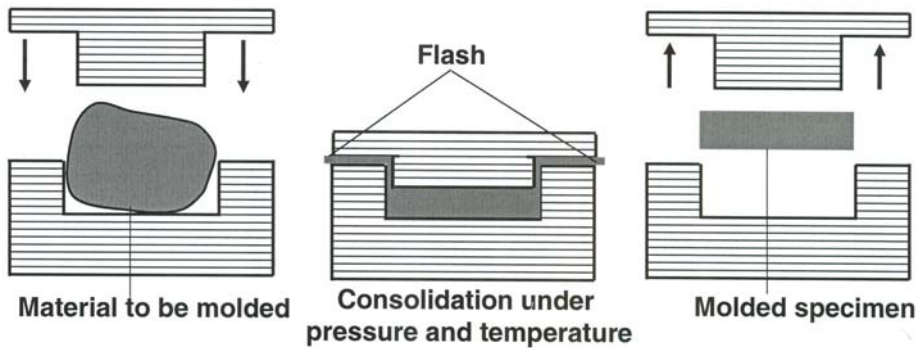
A typical mould used for compression moulding of thermoset resins
